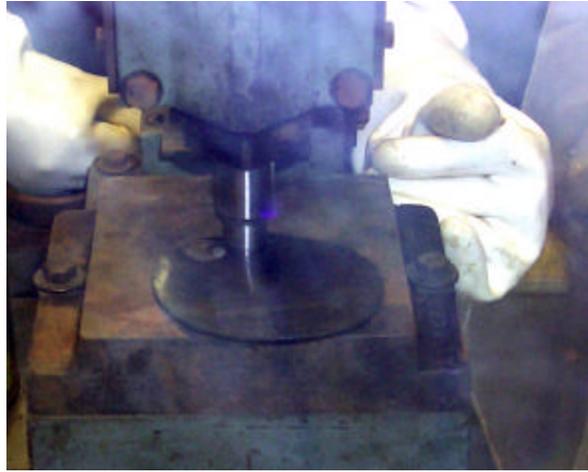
Plutonium foil being punched out of the disc with the stamping machine.
